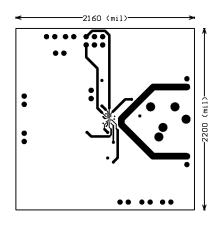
Recommended YZR PCB Layout: Mid Layer 1
